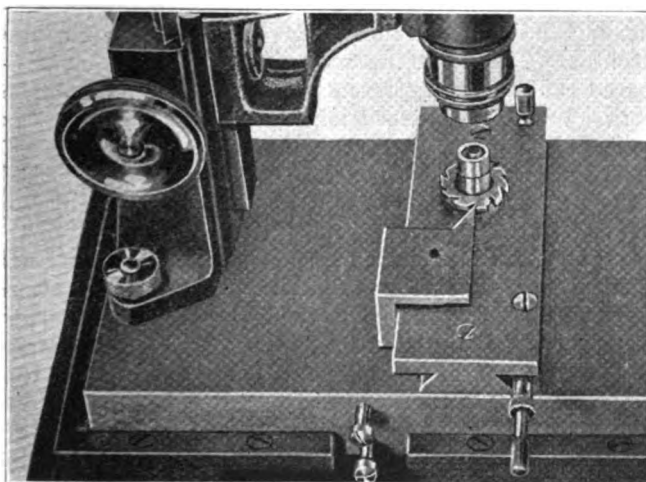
GAGE FOR CHECKING RADIAL-GRINDING OF CUTTER
